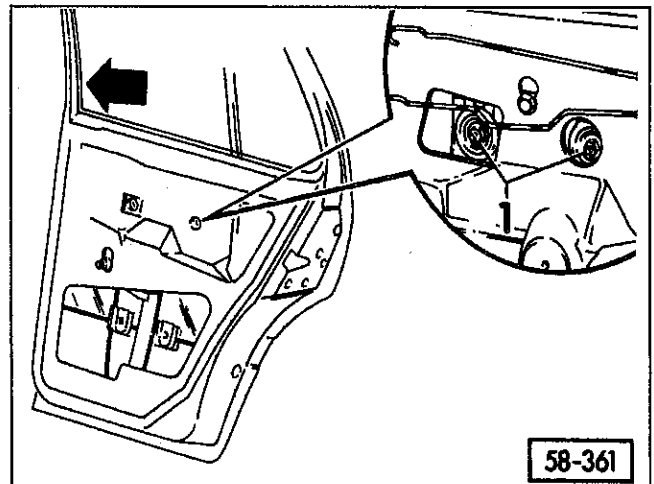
Glass clamping jaw nuts (1). Door glass shown lowered into door.
